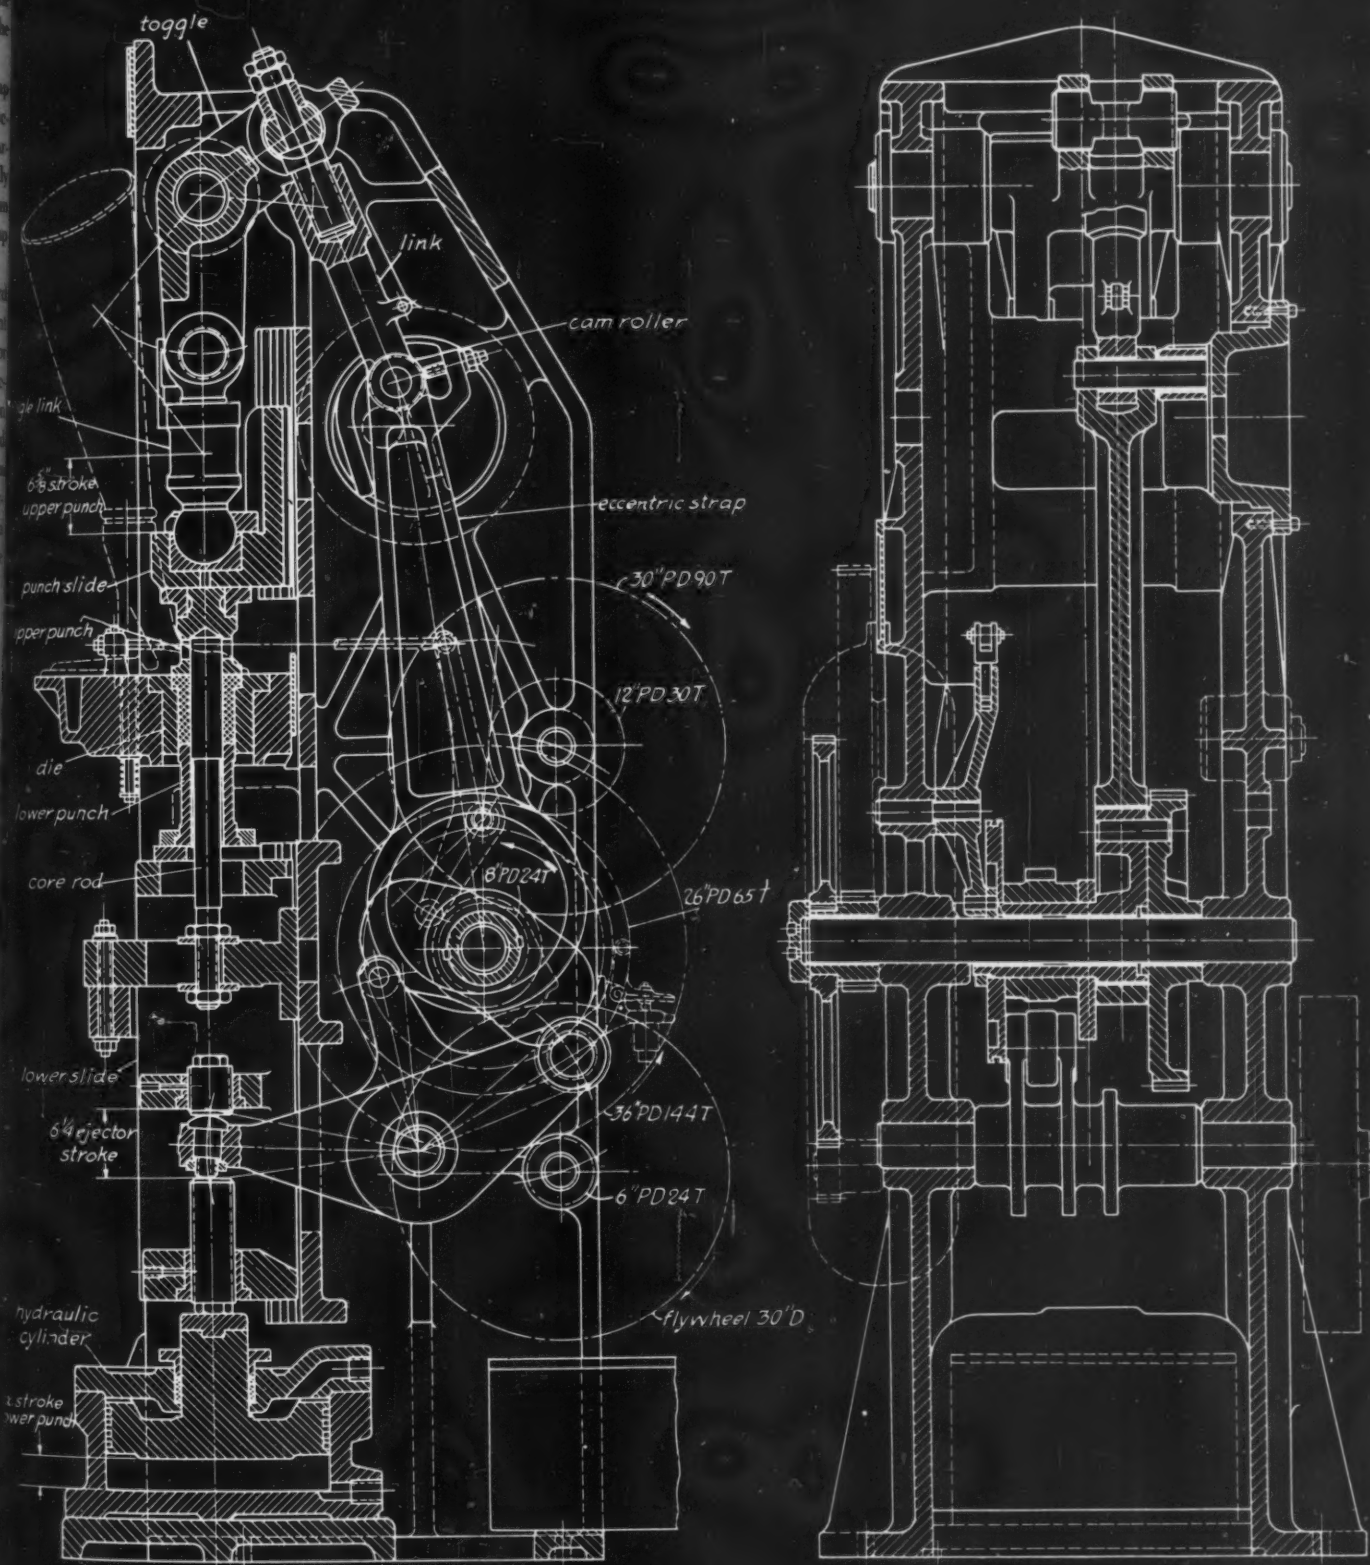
Sectional view of press showing combined mechanical and hydraulic actions on tableting dies. Cam-controlled eccentric linkage allows 60-degree dwell to permit hydraulic ram on lower punch to exert 150-ton squeeze
